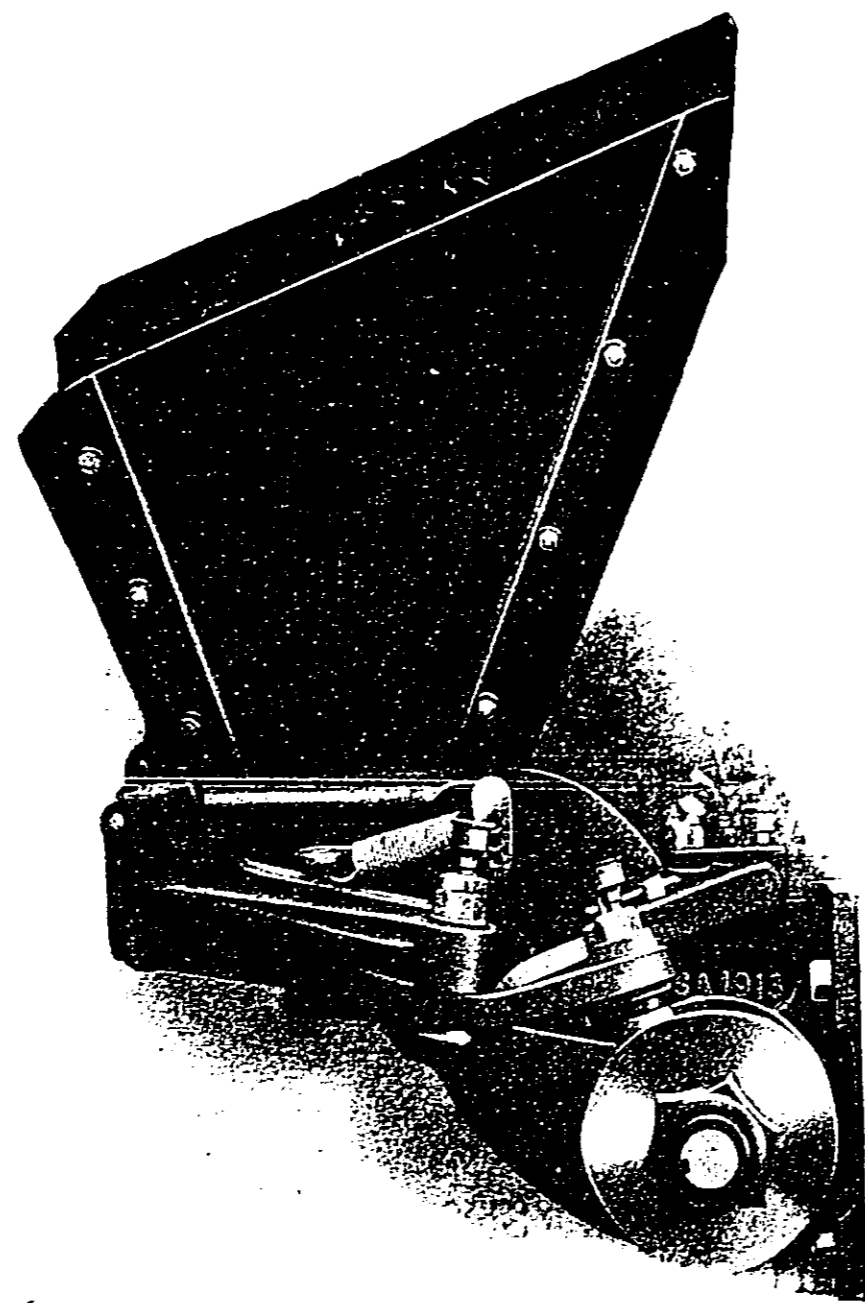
Side view showing Feed Cam, Regulating Nut and Feed Lever.
